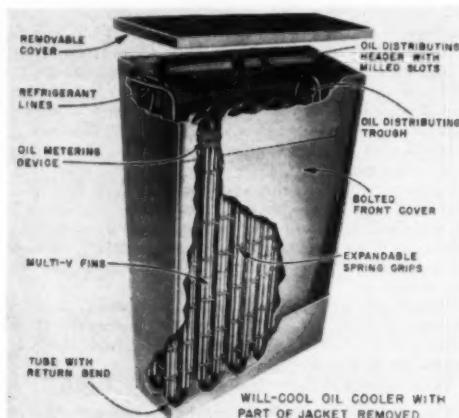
WILL-COOL MACHINE-TOOL OIL COOLER WITH PART OF JACKET REMOVED
